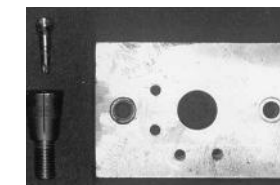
Implant-fixing metal jig. Note slits made through tapered chuck.
